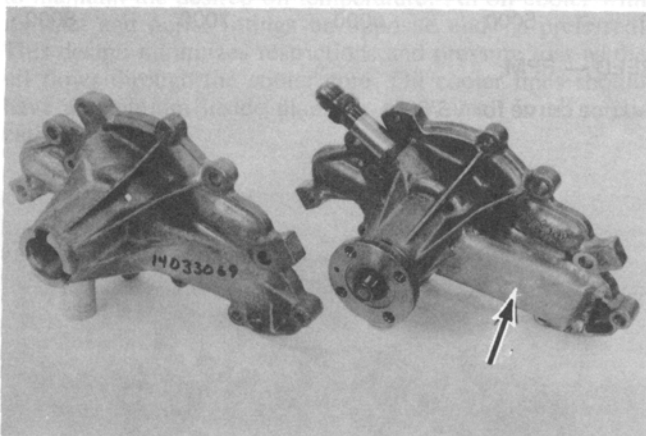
Modify V6/60 aluminum water pump housing for endurance racing by enlarging inlet passage.
